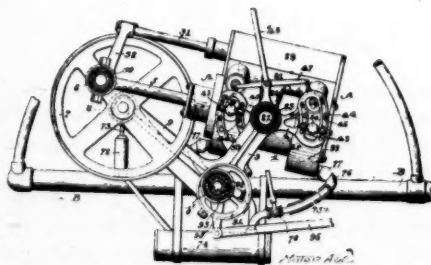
Vertical Section Showing Driving Gear; Cylinder in Elevation.
